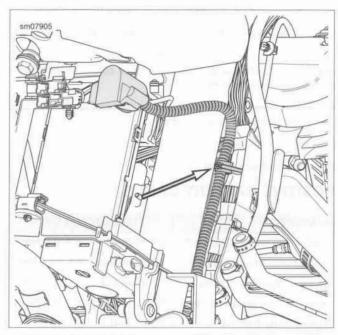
Cable Strap around Positive Battery Cable and Wire Harness
